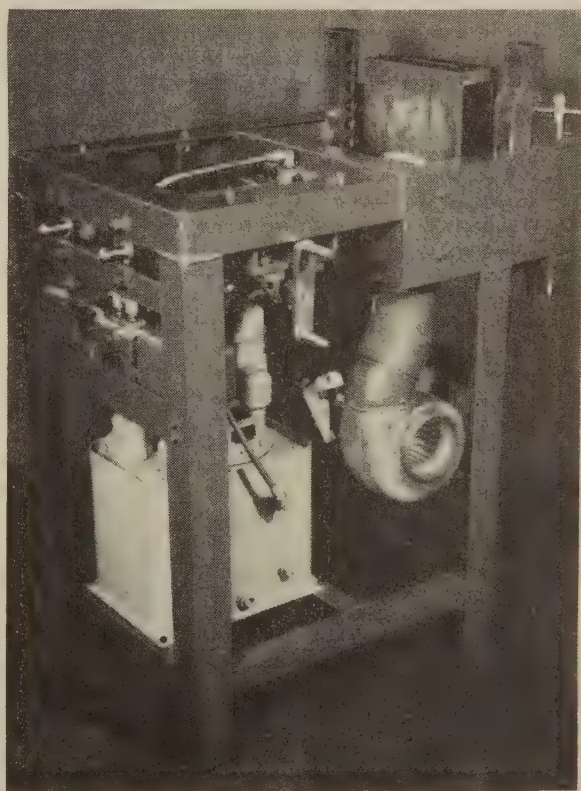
Partly assembled casting machine. This unit is hydraulically operated and air-cooled.
